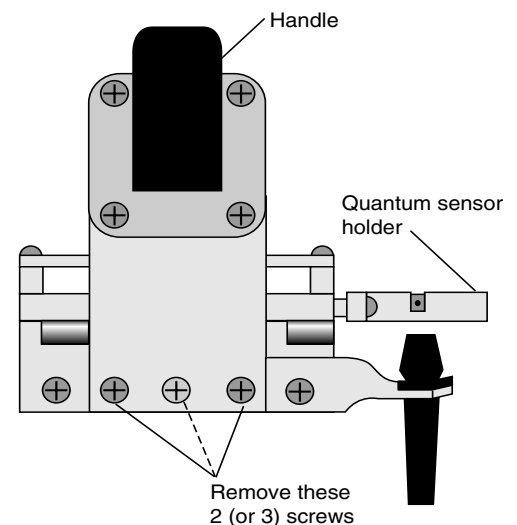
Remove the 2 (or 3) screws on the back of the handle.
